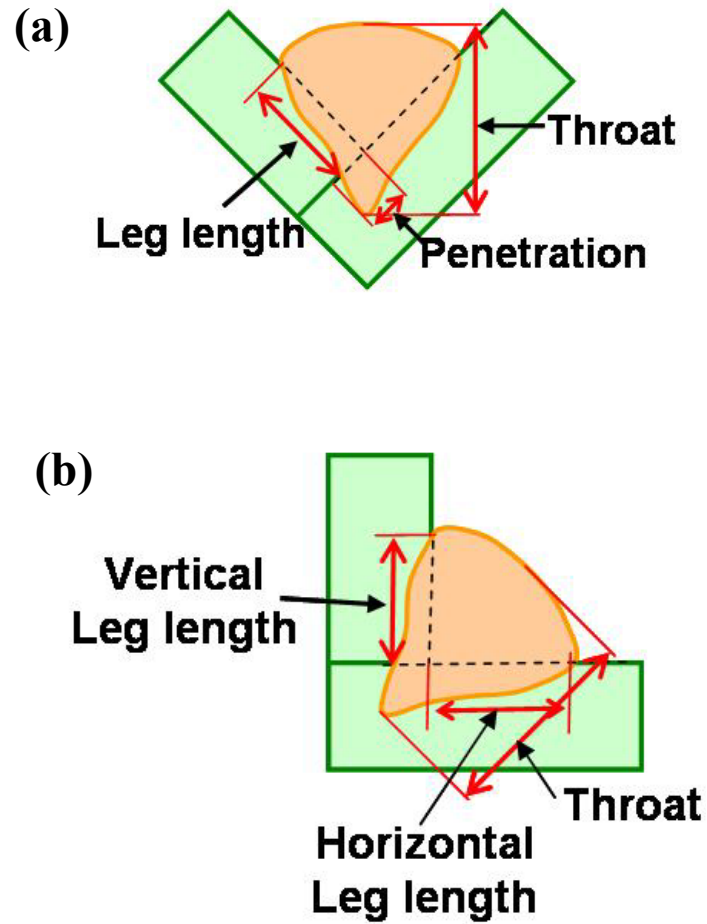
Nomenclature of weld bead geometry used to define (a) V-shape joints and (b) L-shape joints.
